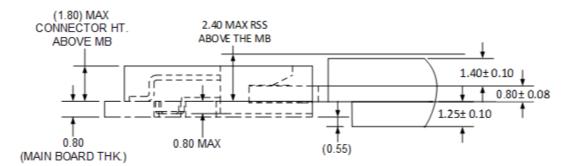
Stack-up Mid-mount (In-line) Double-sided (D3) Module for 1.5 Maximum Top-side Component Height
